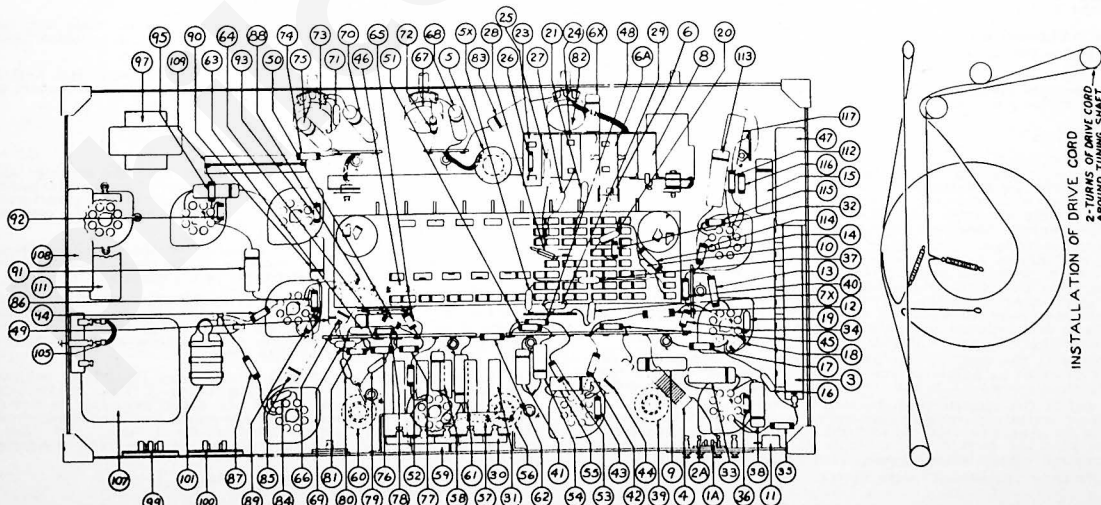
LOCATIONS OF PARTS—UNDER CHASSIS
